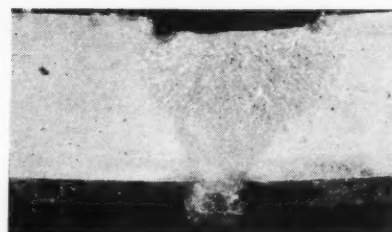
Weld which has not penetrated completely to the far side
